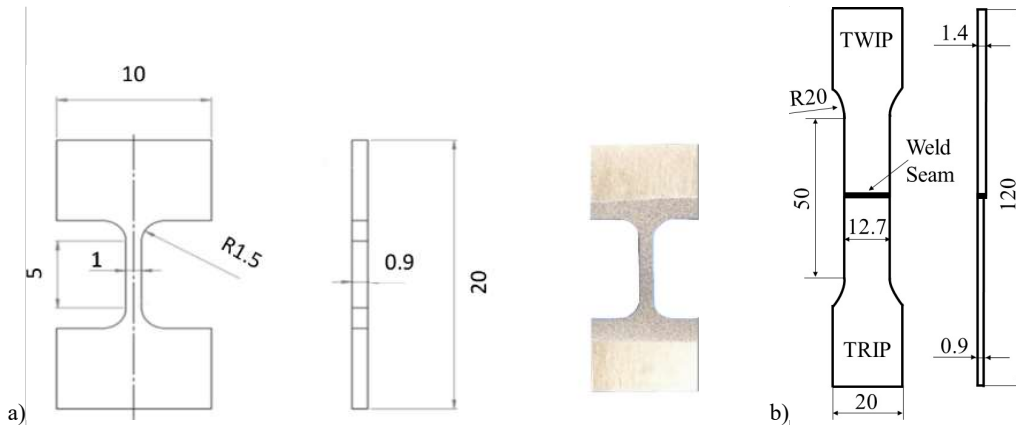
a) Micro-specimen and b) macro-specimen size. All the dimensions of the drawings of image a) and b) are in “mm”.
